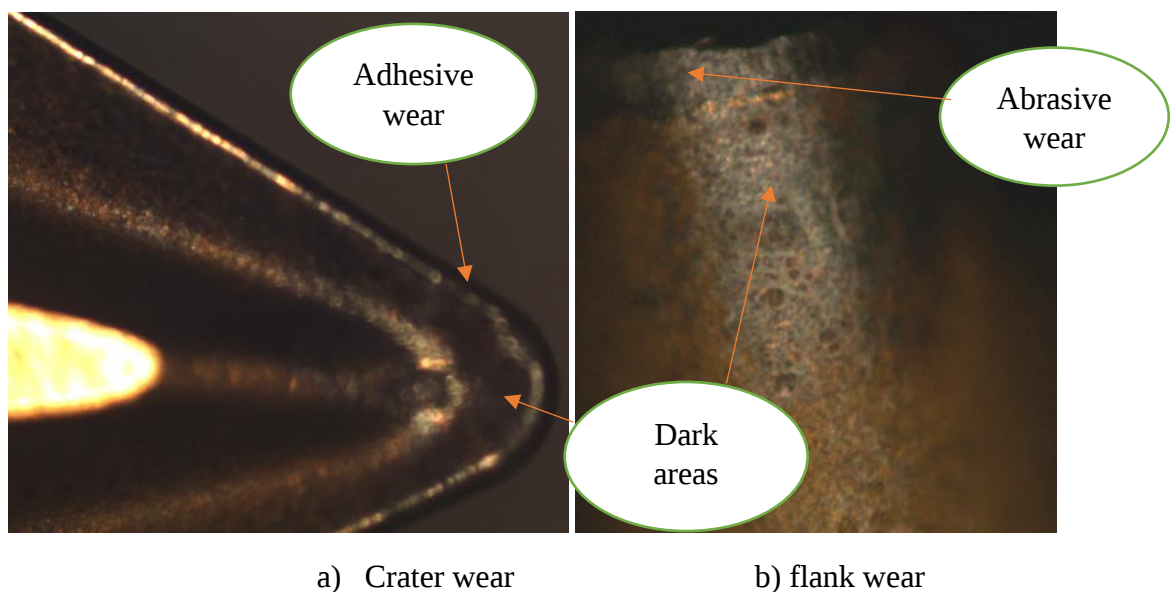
31 Crater and Flank Wear at 250 m/min, 2.5 mm, and 0.25 mm/rev (Exp. 9)
